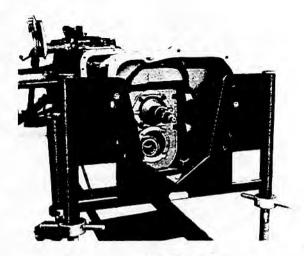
P.T.O. MAIN DRIVE SHAFT REMOVED
